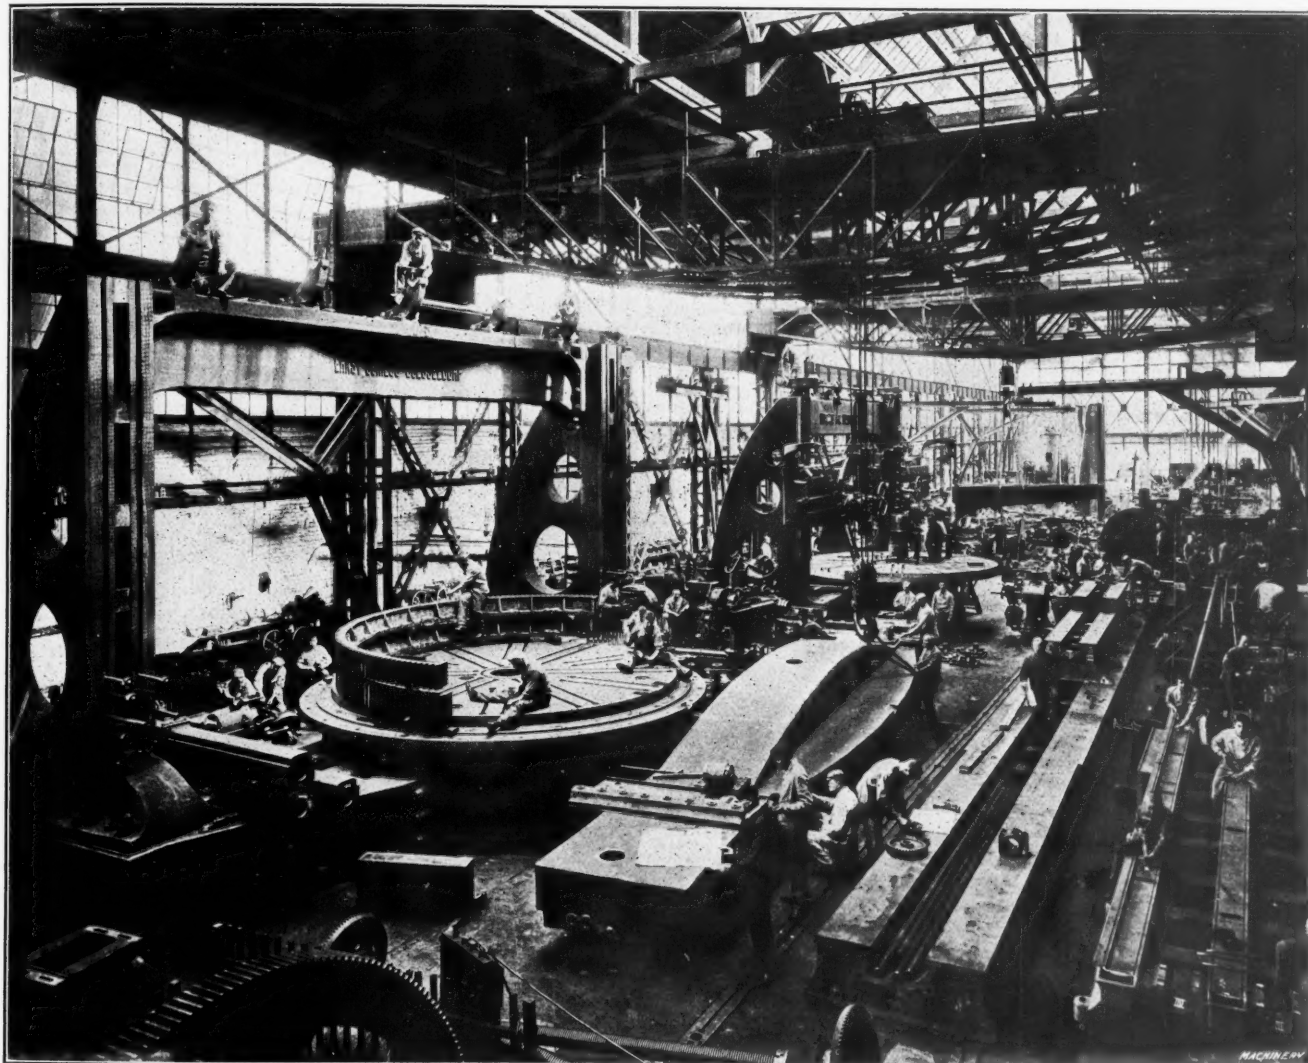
Part of the Erecting Shop in the Ernst Schless Werkzeugmaschinenfabrik
